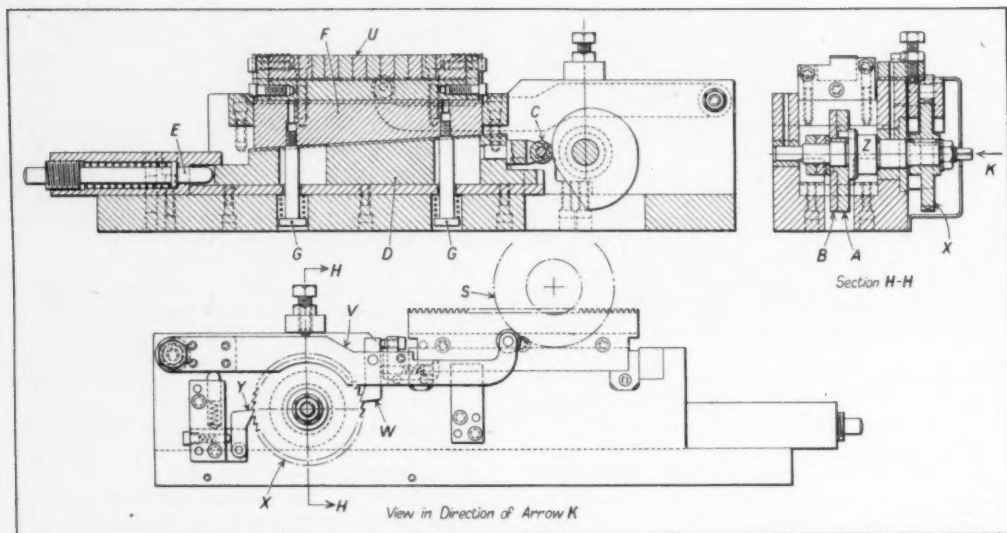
Details of the Ratchet-and-cam Actuated Wedge Mechanism for Raising the Die Assembly of the Character-rolling Equipment are Here Shown. The Dies are Raised Approximately 0.0005 in. Each Time the Fixture is Moved Towards and Away from the Work-carrying Arbor
